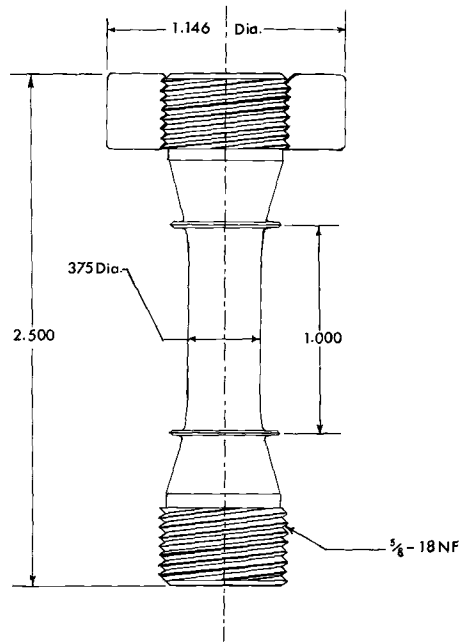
Thread-end specimen and adapter, $\frac{5}{8}$ -in. diameter.
